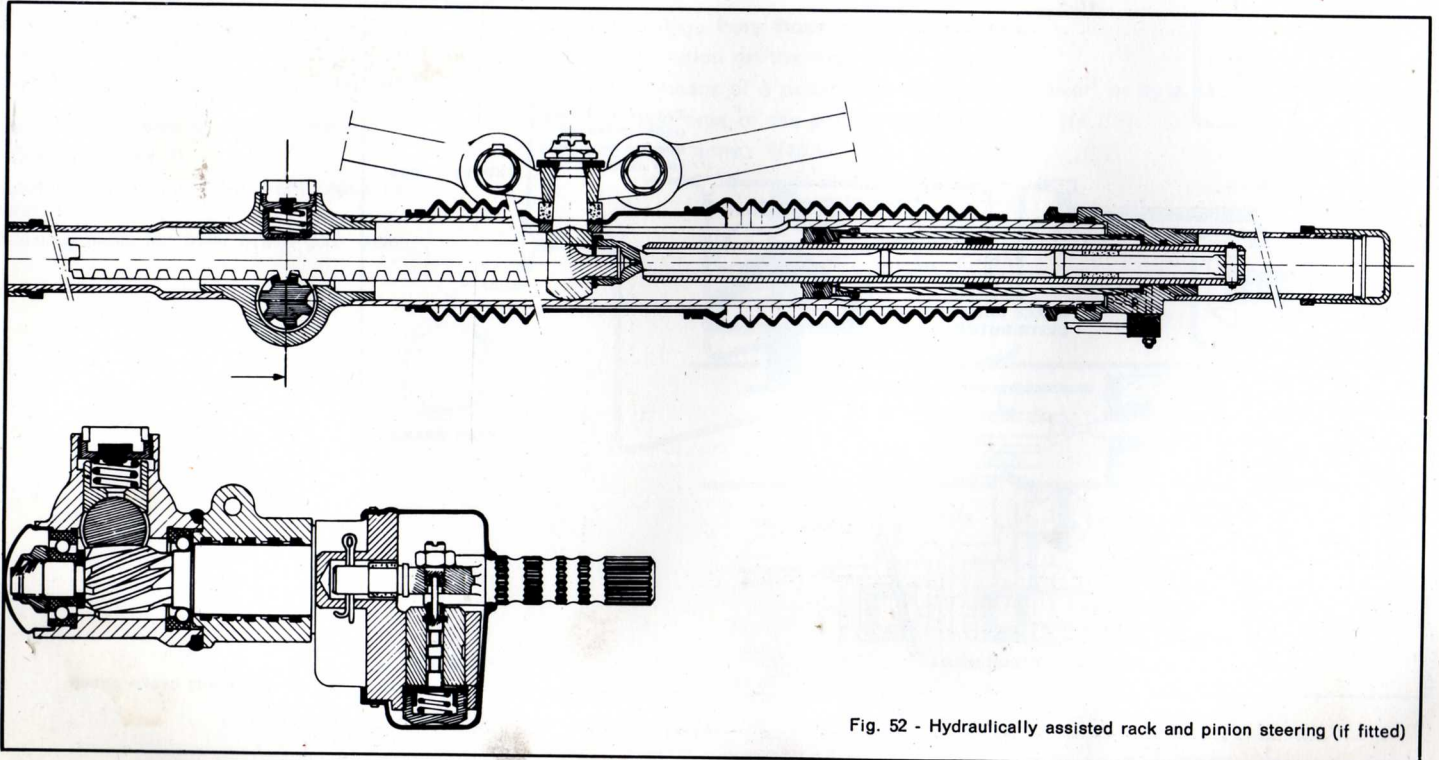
Hydraulically assisted rack and pinion steering (if fitted)
